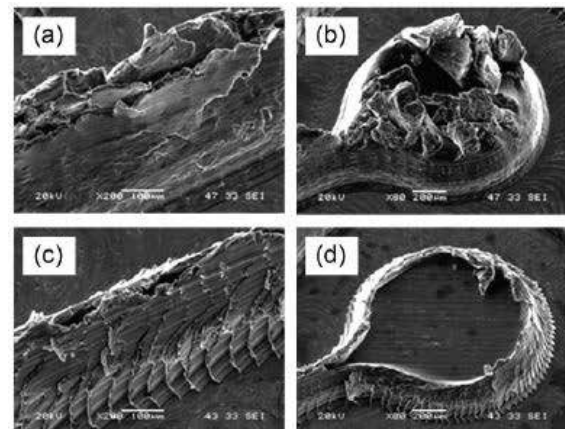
Scanning electron microscope results of burrs formed by (a)Down milling with straight tool and (b) Down milling with 150 tapered tool, (c) Up milling with straight tool & (d)Up milling with150 tapered tool [12]
